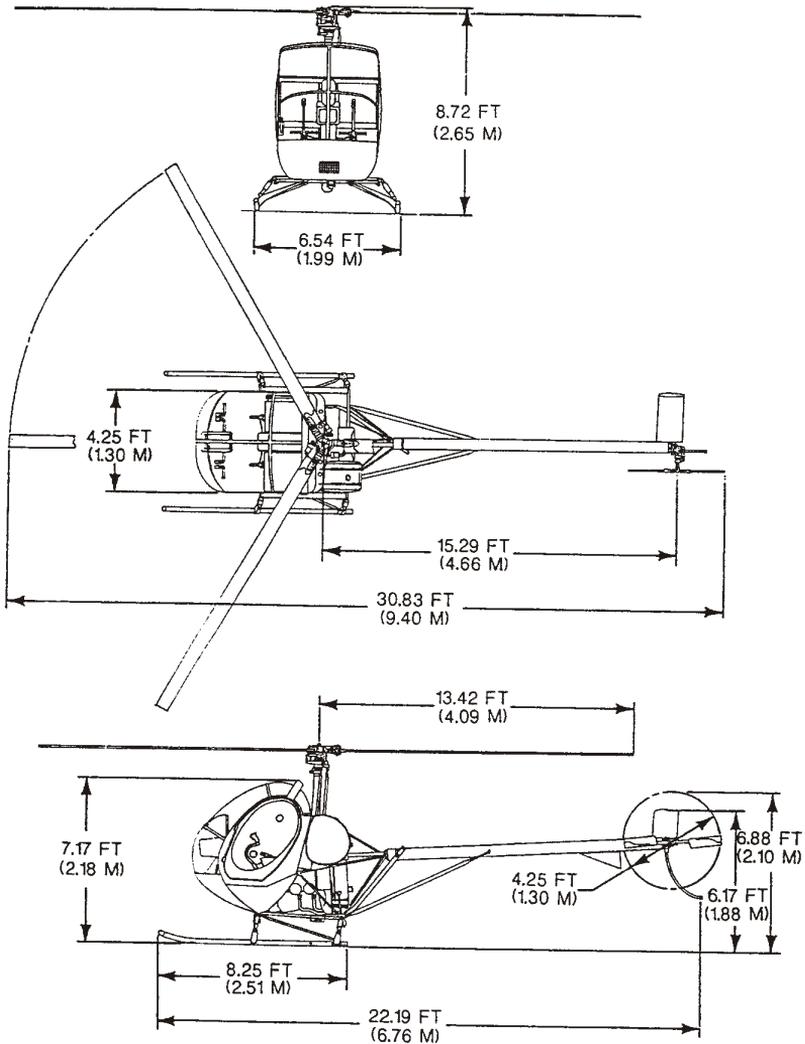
269C-1 Helicopter - Principal Dimensions
